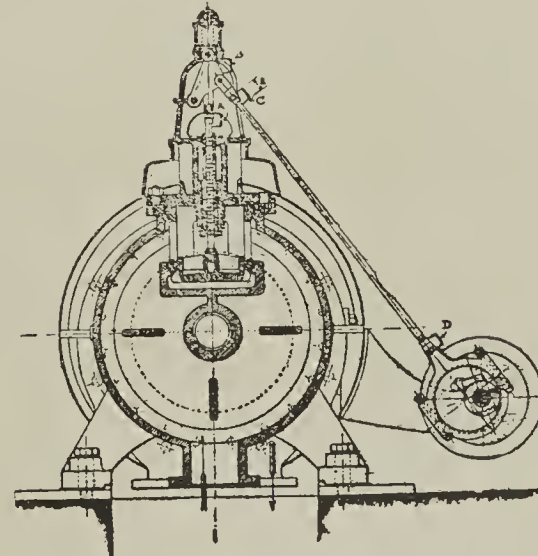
CROSS SECTION OF CYLINDER AND VALVE GEAR.
